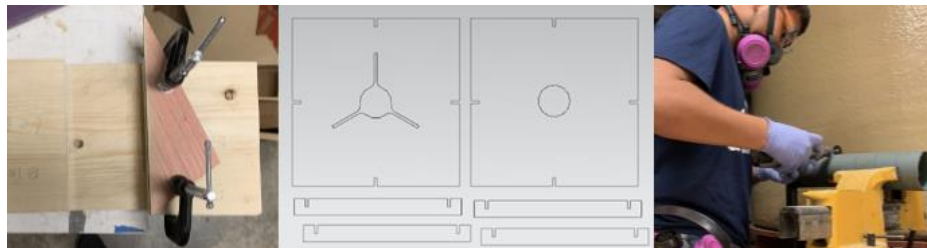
Fin Taper set up (left), NX 12 design of Fin Fixture (middle), and Fin Slots being cut with Dremel (right)
